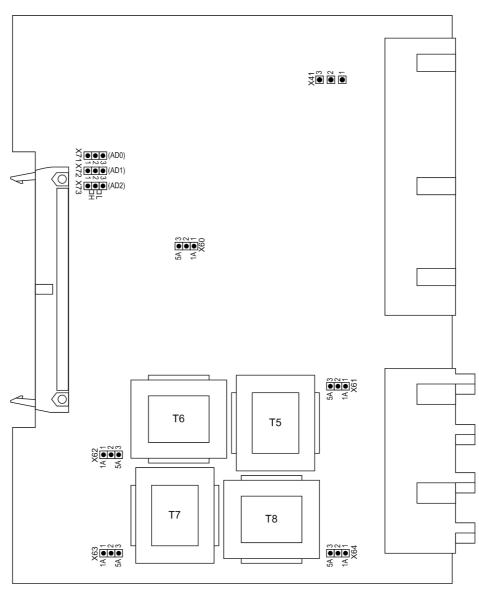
Input/output board C-I/O-2 with representation of jumper settings required for checking configuration settings
